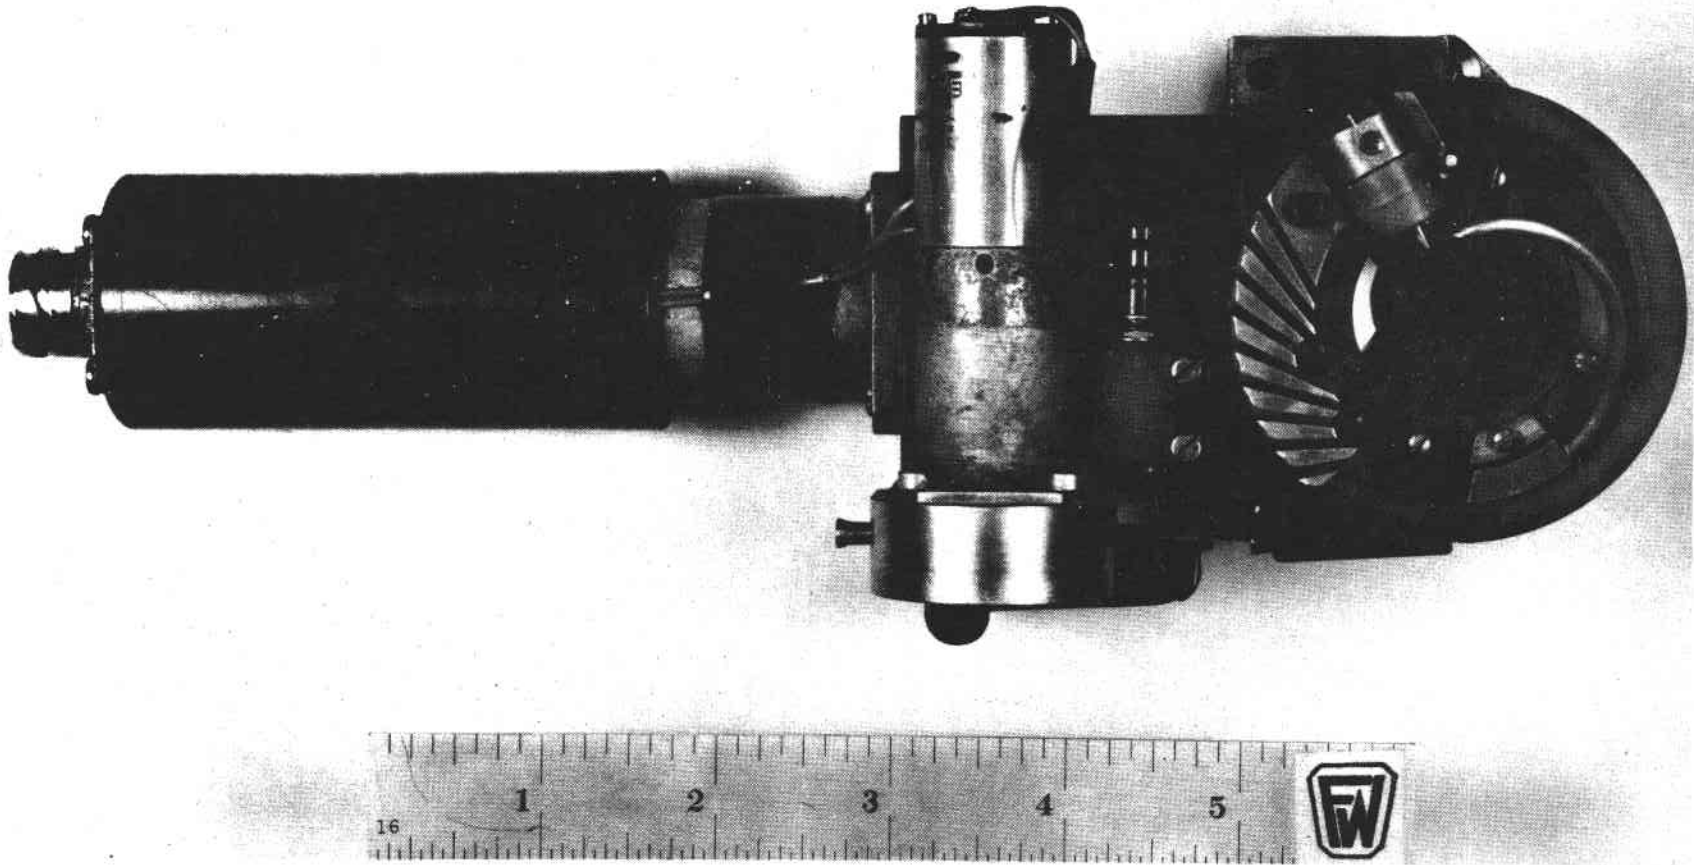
Plan View of Miniature Tube Orbital Welding Torch
